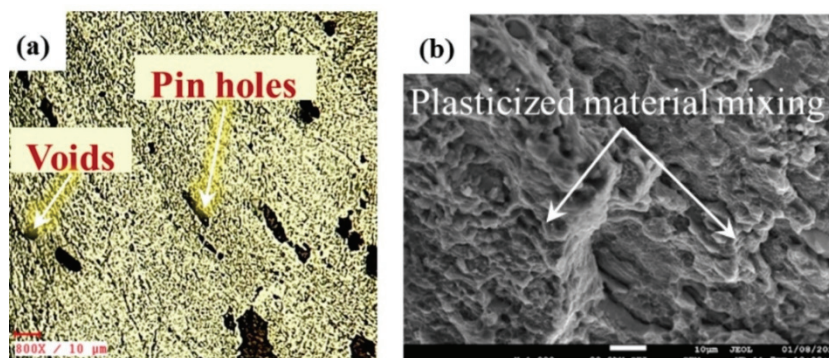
a) Voids and pinholes; b) improved material mixing and coalescence during FS welding.
